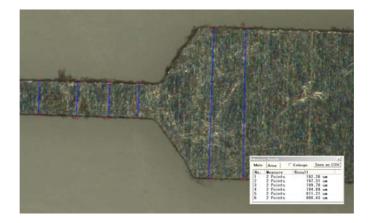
Measurement of actual dimensions after machining Magnification 75X. Machine dimensions: 0.250mm, 0.860mm, Actual dimensions: 0.196mm, 0.810mm Average gap width =  $(250 - 196) - 30/2 = 12 \ \mu m$
